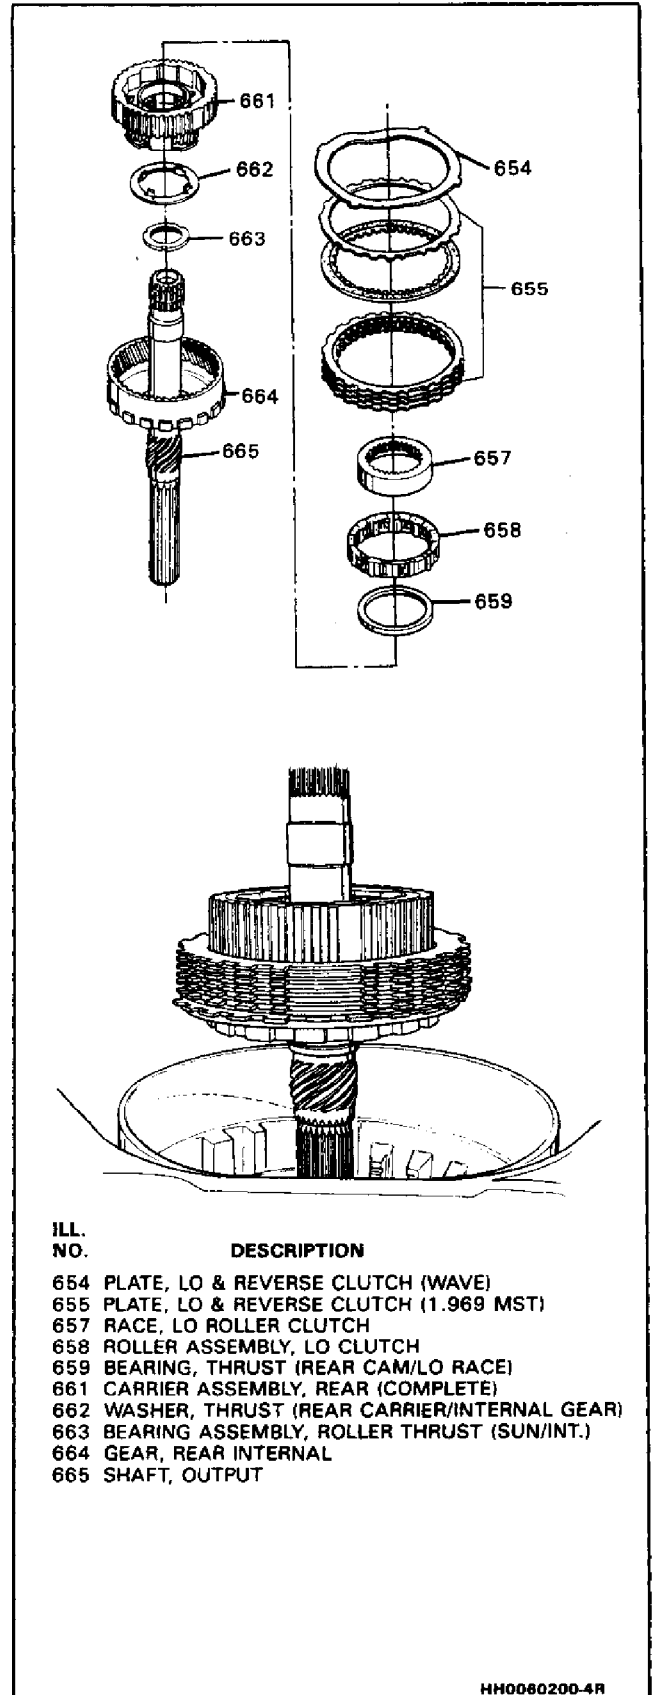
Removing Output Shaft, Rear Internal Gear and Carrier Assemblies
